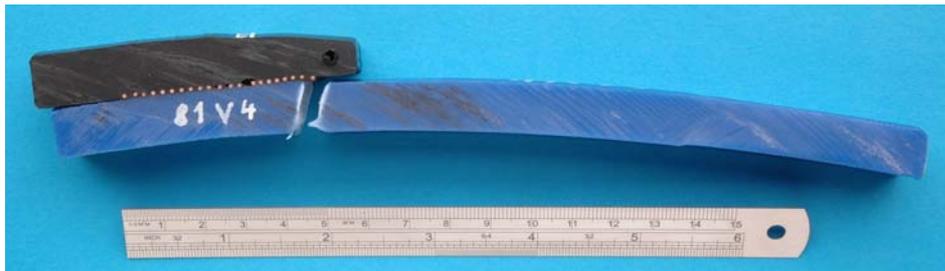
Fig.VI ISO peel decohesion test specimen showing fracture through the pipe wall.
